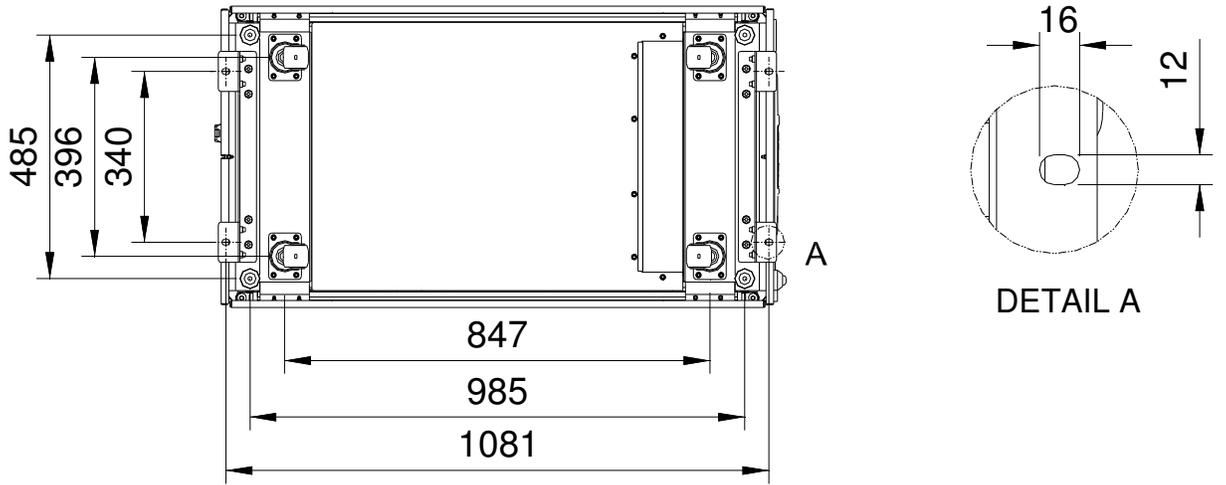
UPS and BC bottom view show the position of casters and fixing holes
